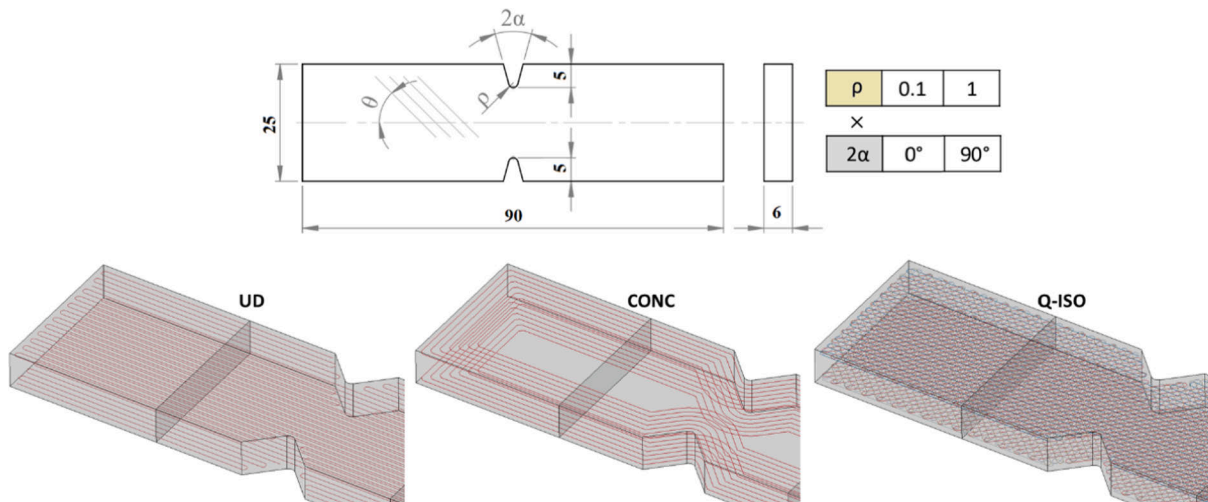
Specimen geometries (dimensions in mm) and fiber paths (only first and last layer groups are shown).
